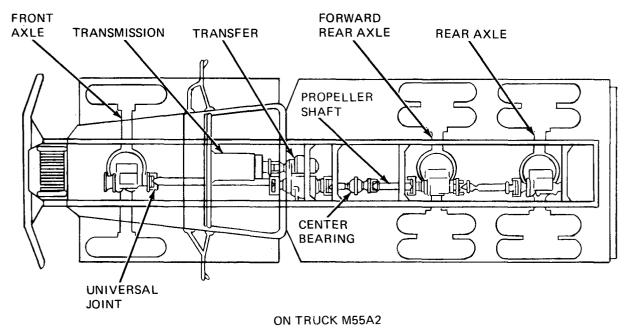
Propeller Shaft Arrangement (Truck M55A2)
